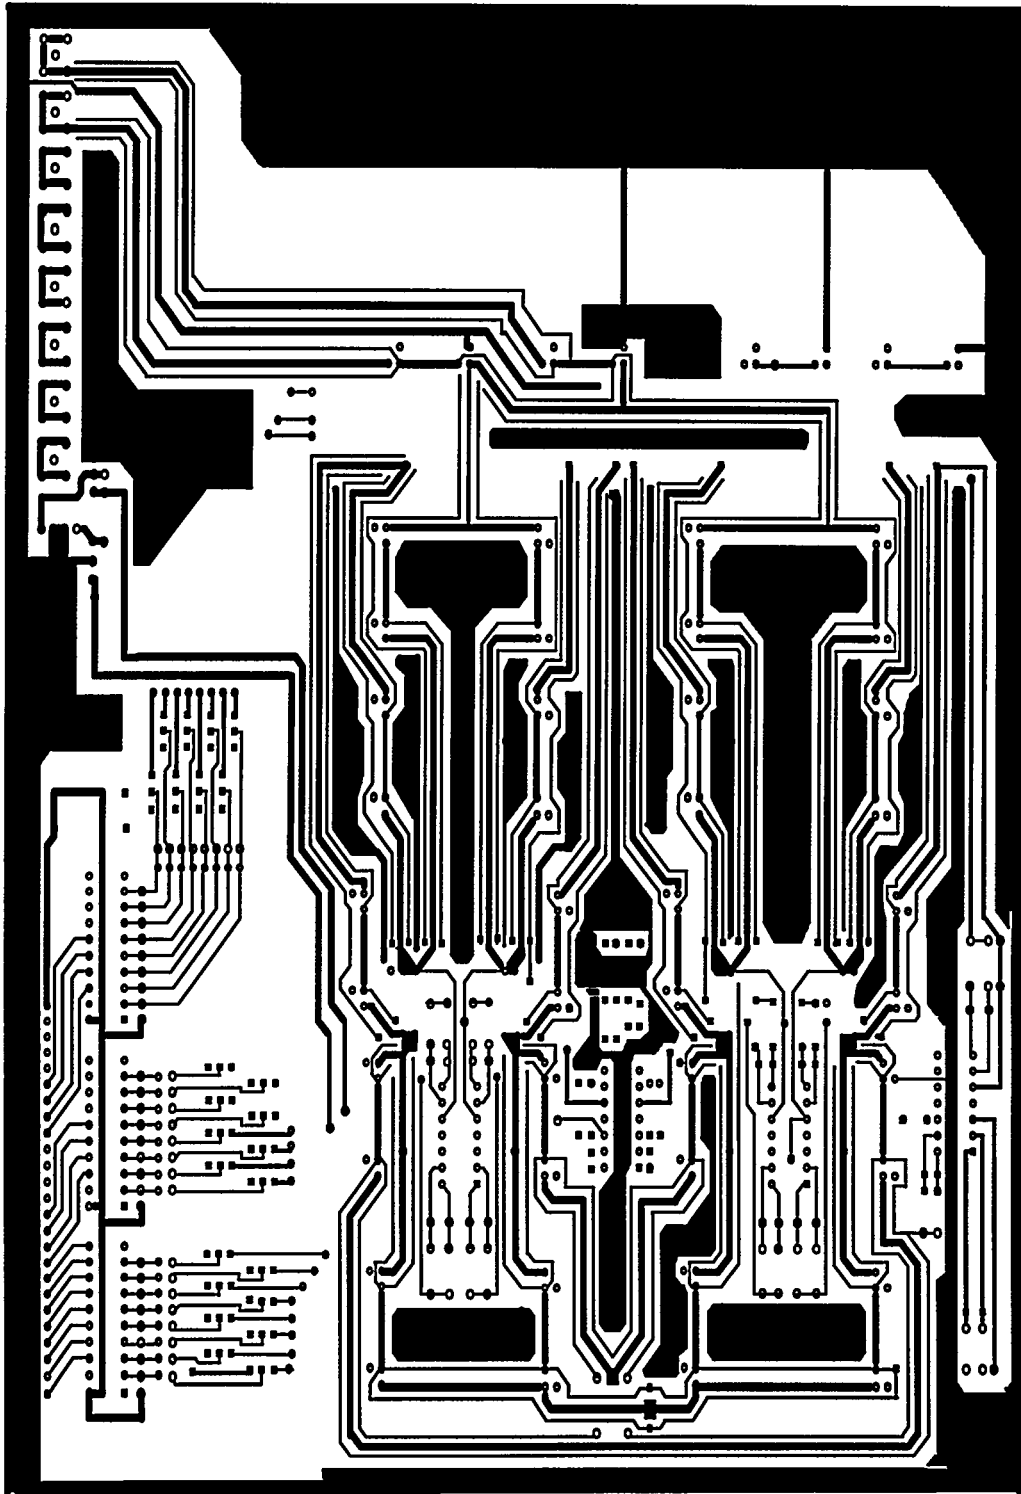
PC board layout of the solder-side of the high accuracy circuit as modified to be compatible with cabinets ordered for the system.
